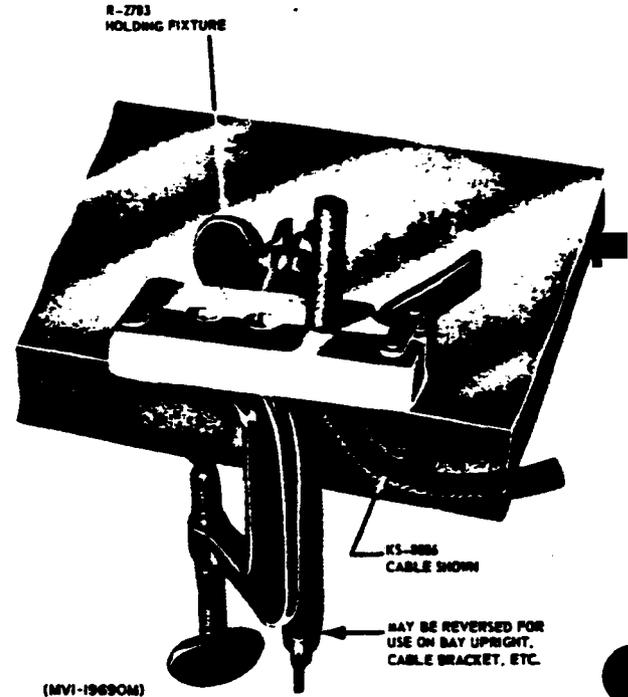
HOLDING FIXTURE FOR COAXIAL CABLE (PARS. 4.14, 4.221)
